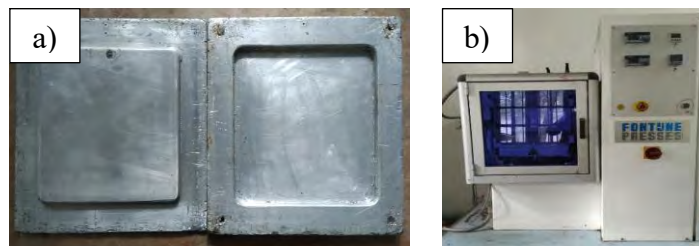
Hot press molding a) aluminium mold, b) Fontijne hydraulic hot press machine.
